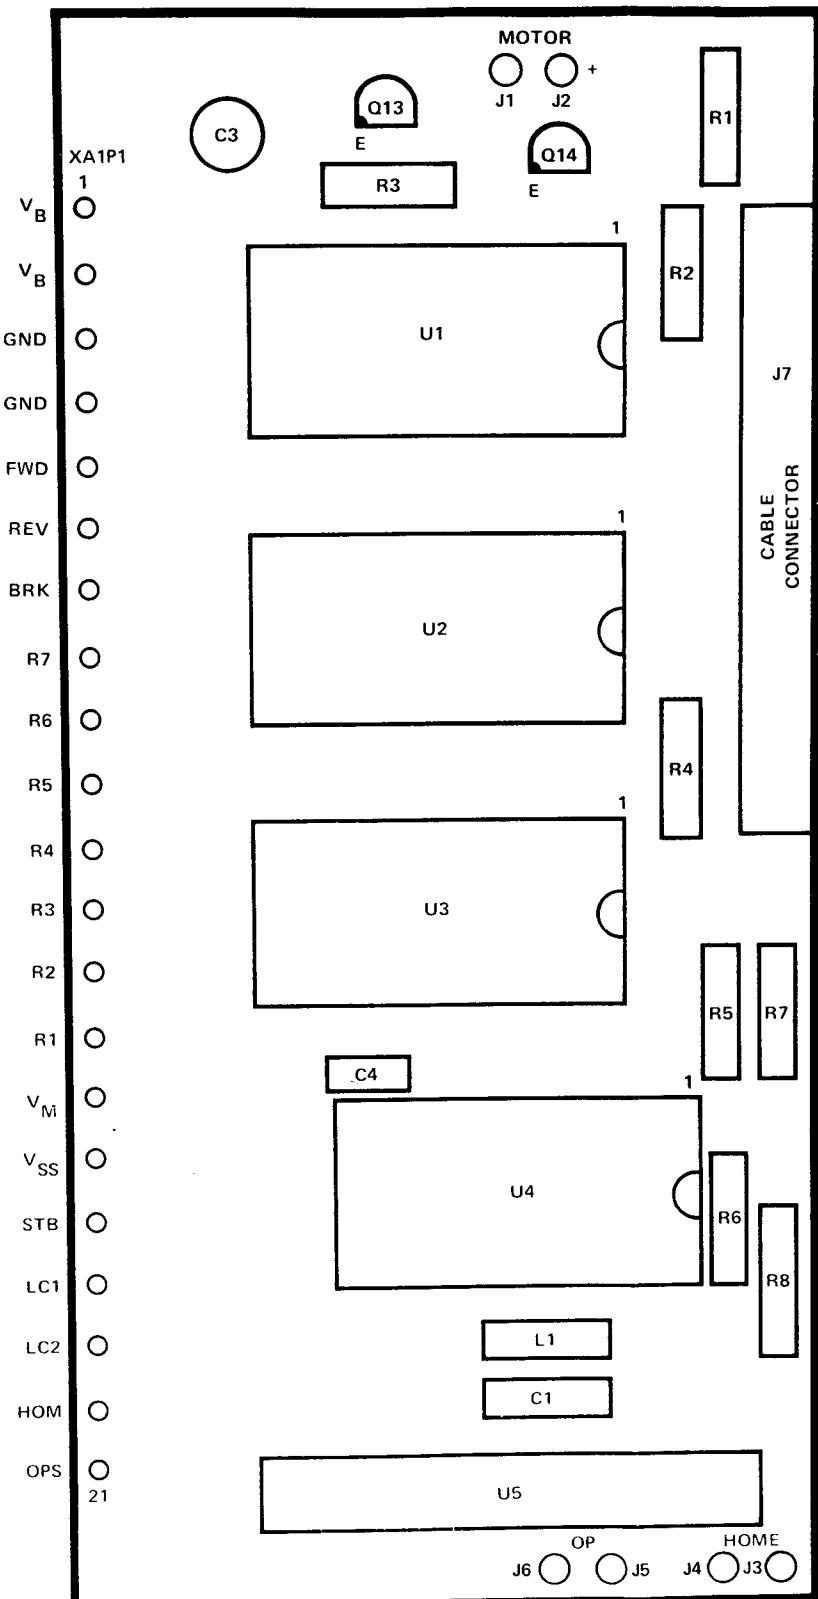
Printer PCA (A4A1) Component Location Diagram
